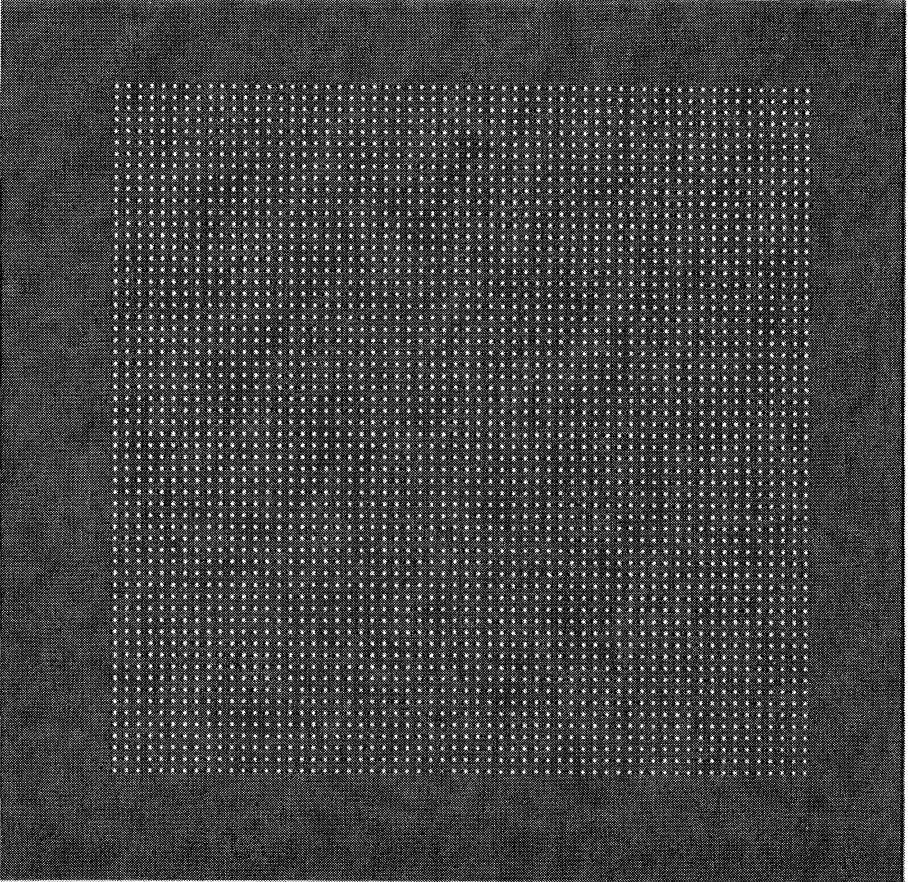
Green sheet, with location holes, 3600 vias and 0.007 in. thick.
